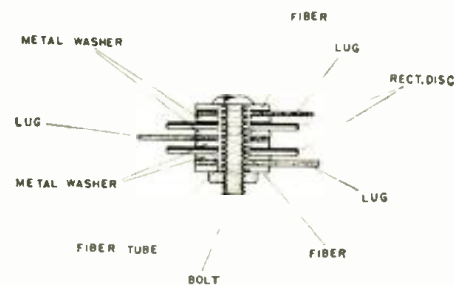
The two-plate rectifier is simple to assemble but the center bolt must be insulated from the rectifier plates used.
